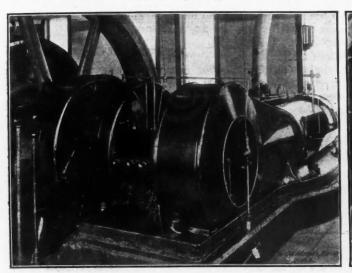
Showing How the Crank Pin on the Engines are Guarded
